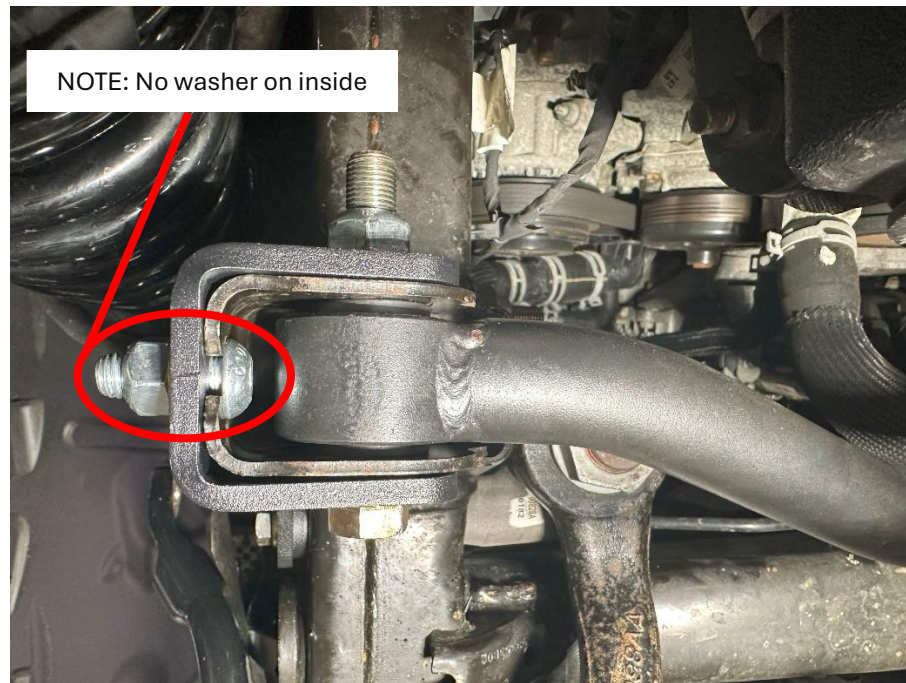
Track Bar Reinstalled with proper lower hex drive bolt orientation
